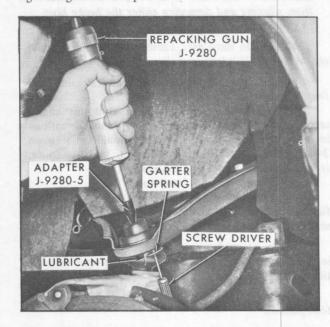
Repacking Front Upper Spherical Joint Seal
